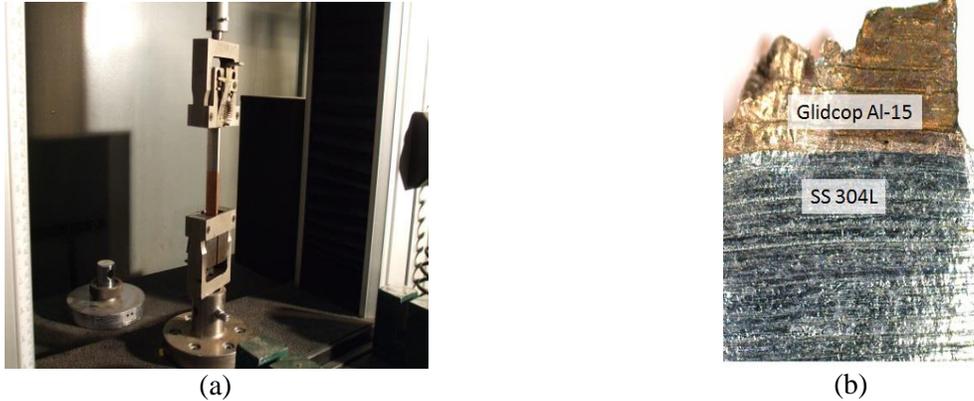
Tensile testing of a sample brazed at NSLS-II in vacuum atmosphere, (a) tensile test setup with sample having a cross section of 3 mm x 19 mm, (b) fracture in Glidcop Al-15 away from brazed joint.
